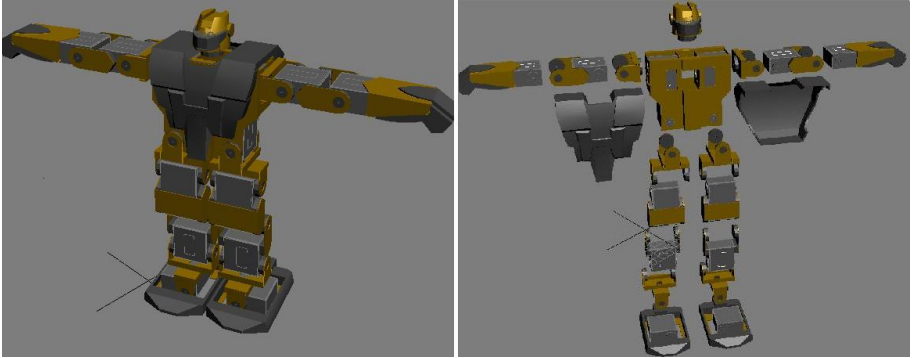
Geometrical model of the Robonova-I robot. a) Assembled robot; b) Exploded main parts of the robot.
